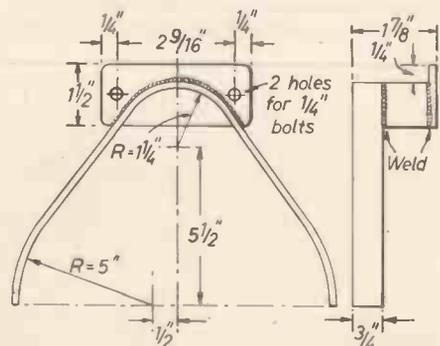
Chain guard detail for Clinton engine. Make from 1/8 in. thick or 10 gauge M/S plate. The chain guard for the J.A.P. engine is similar.
